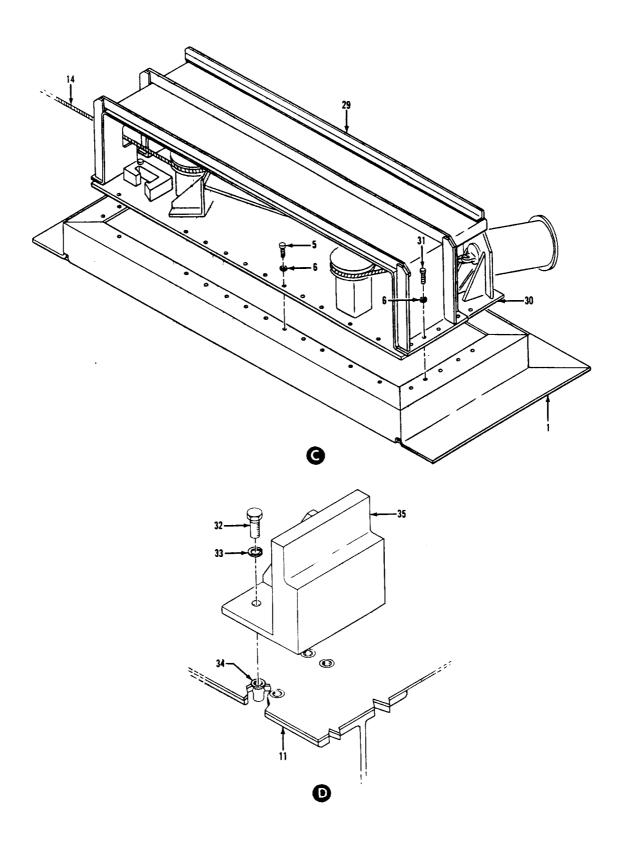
Extension Platform Assembly (Sheet 3 of 13)
